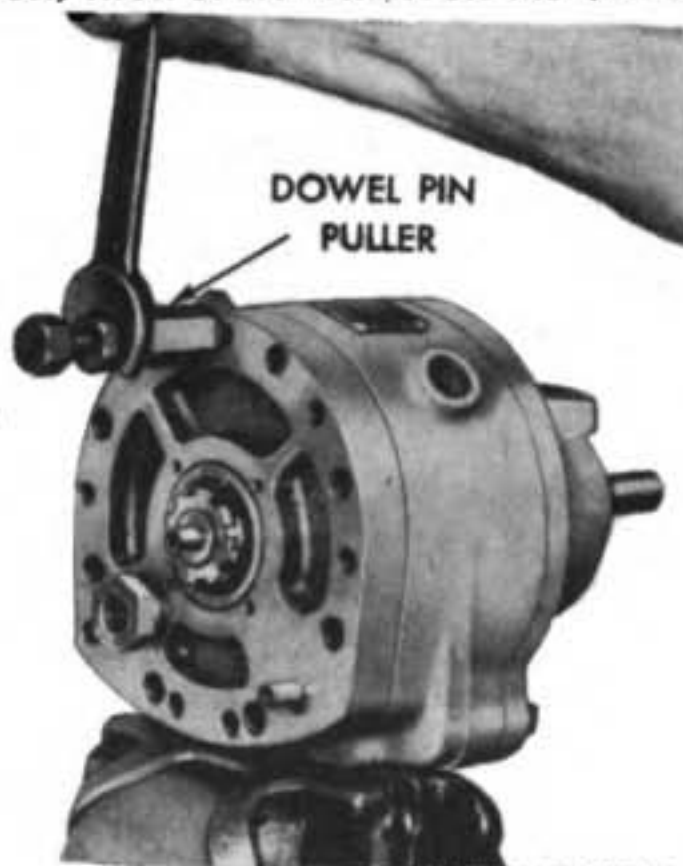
Removing Rotor Shaft Dome End Bearing Cap
